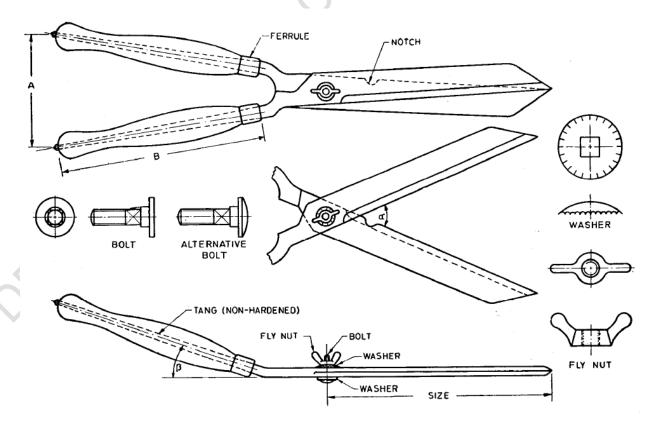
Non-powered hand-held hedge shears straight-edge type assembly
